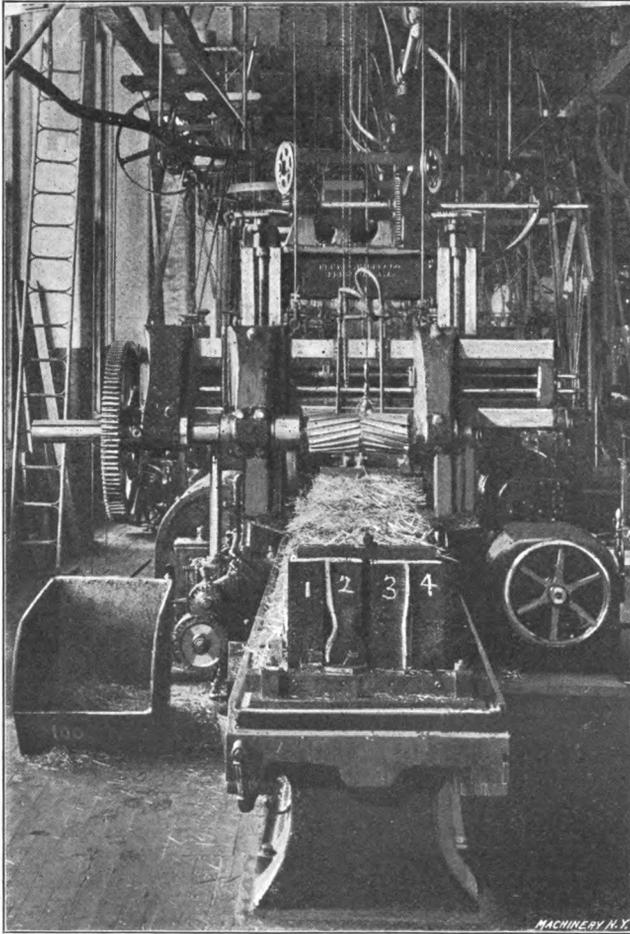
Finishing the Top and Bottom Edges of the Main Rods in the Slab Milling Machine
